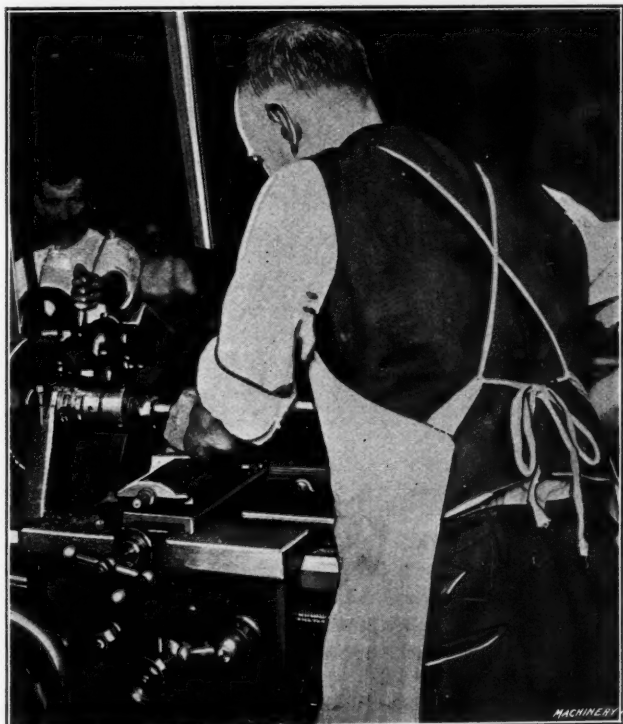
Making Combination Blanking, Cupping and Drawing Dies
